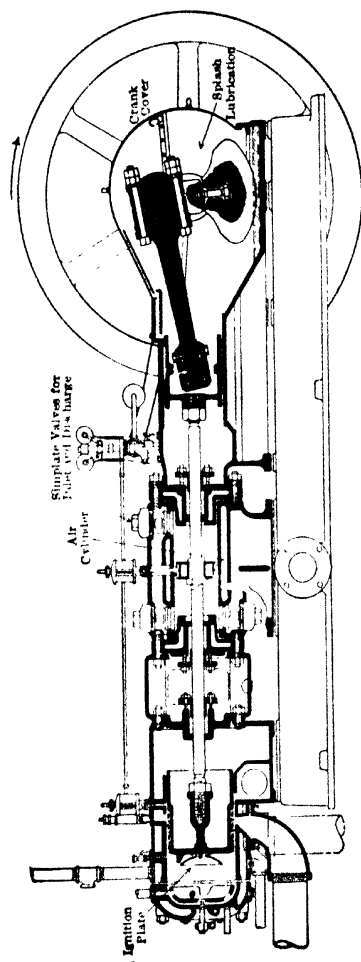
Straight-Line, Gasolene-Driven Compressor (Chicago Pneumatic Tool Co.)
